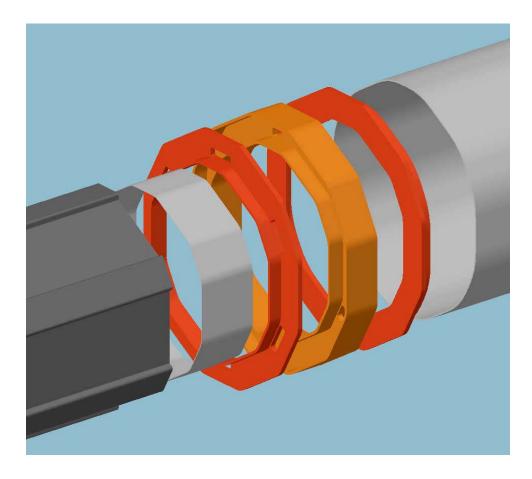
Exploded view showing details of the coolant bulkhead/manifold.
